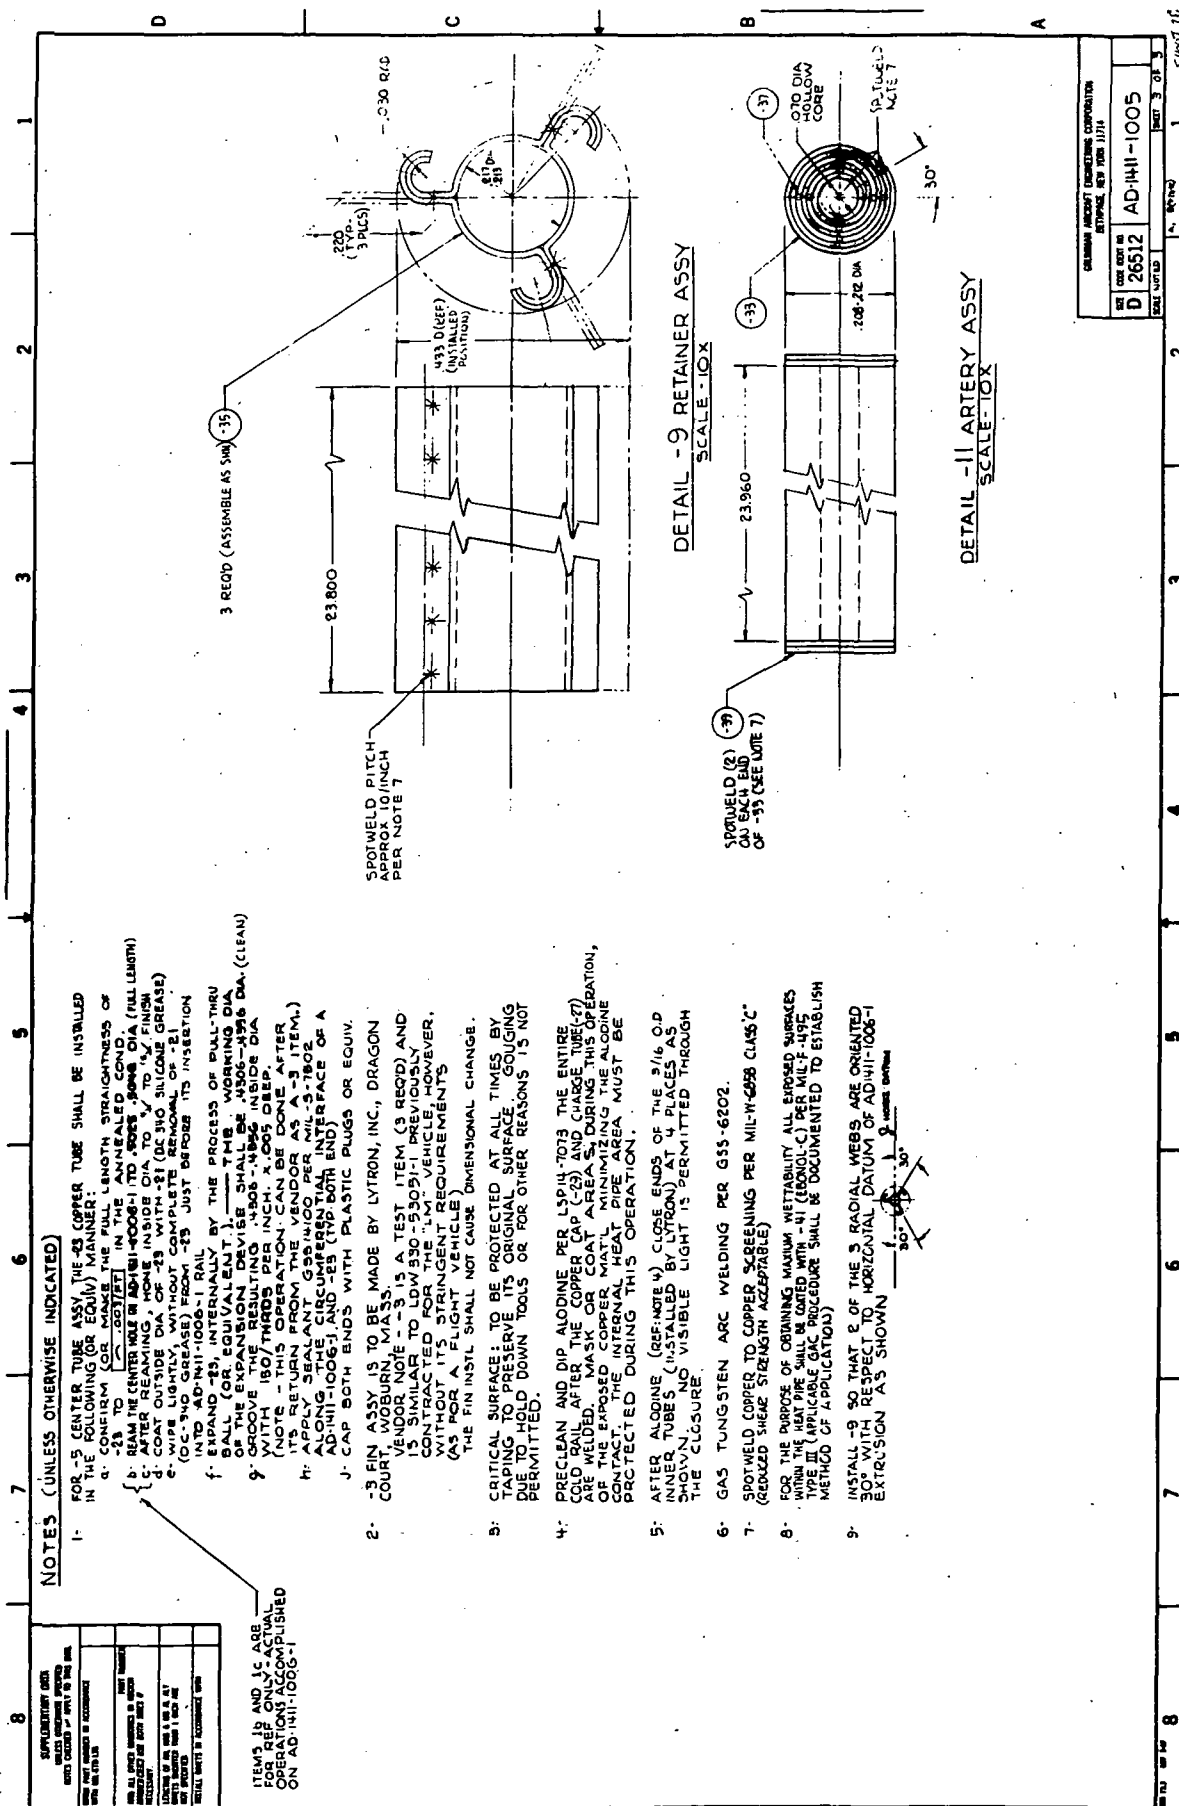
HP Augmented Cold Rail Assembly (Sheet 3 of 3)
